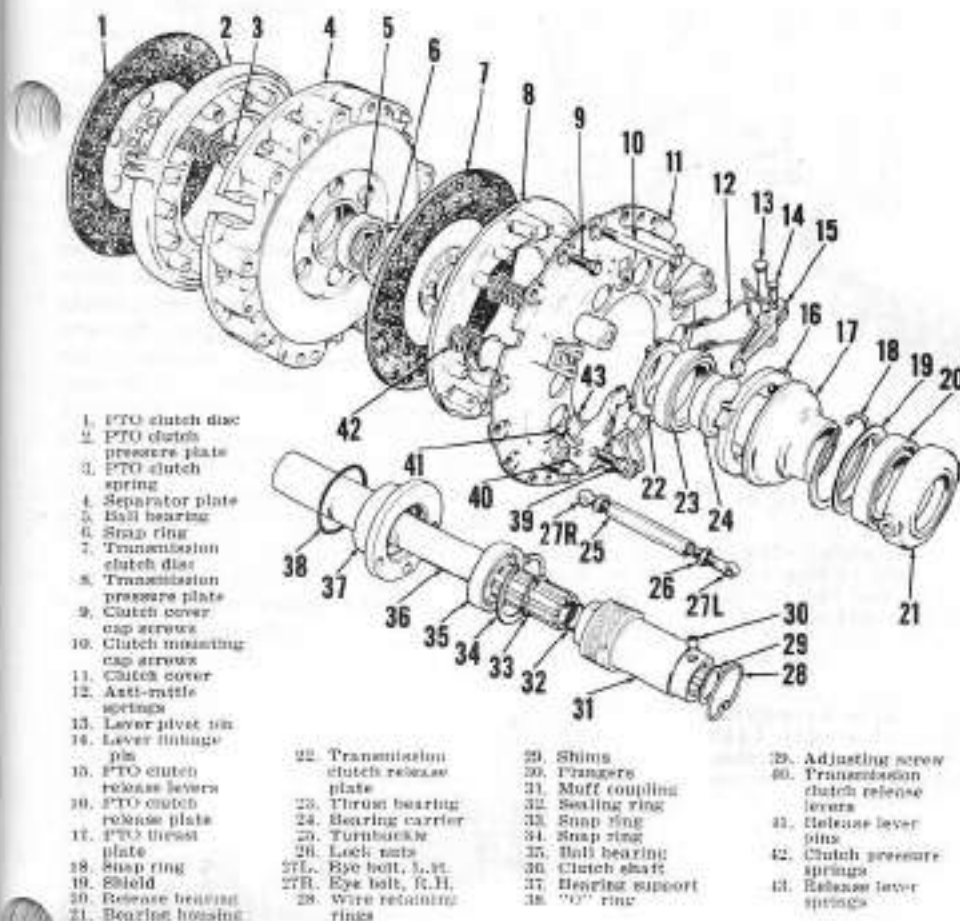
Exploded view of model 1200 clutch. A separate release bearing, plate and release levers are used for each clutch unit.
